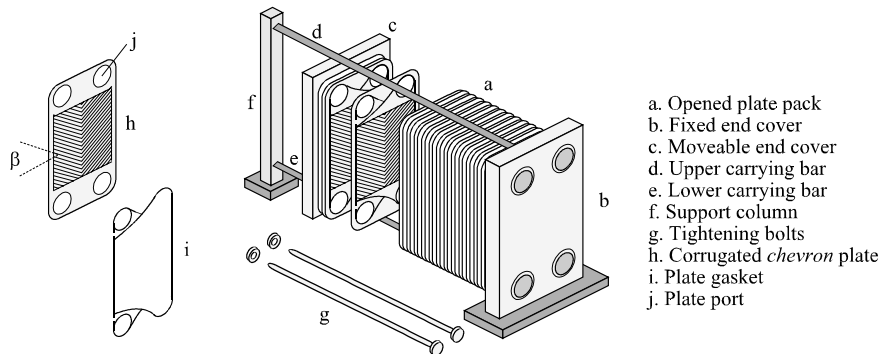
The gasketed plate heat exchanger assemblage and parts.
